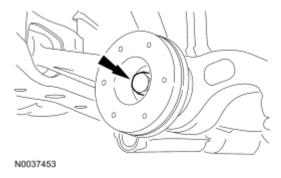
Locating Lower Control Arms Through Bolt Courtesy of FORD MOTOR CO.
